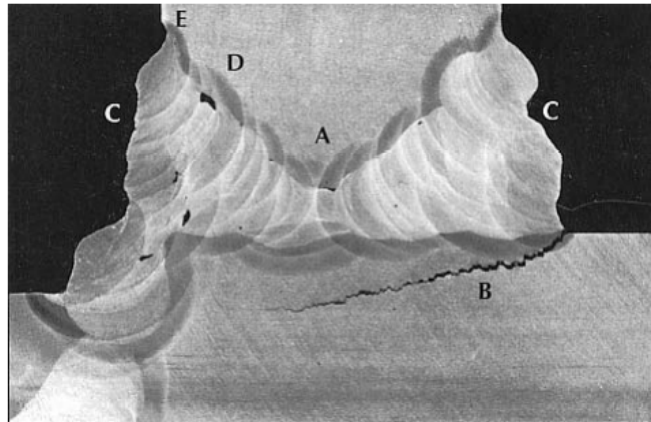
Weld defects:(A) lack of fusion; (B) lamellar tearing;(C) poor profile; (D) inclusions; and (E) undercut [20]
